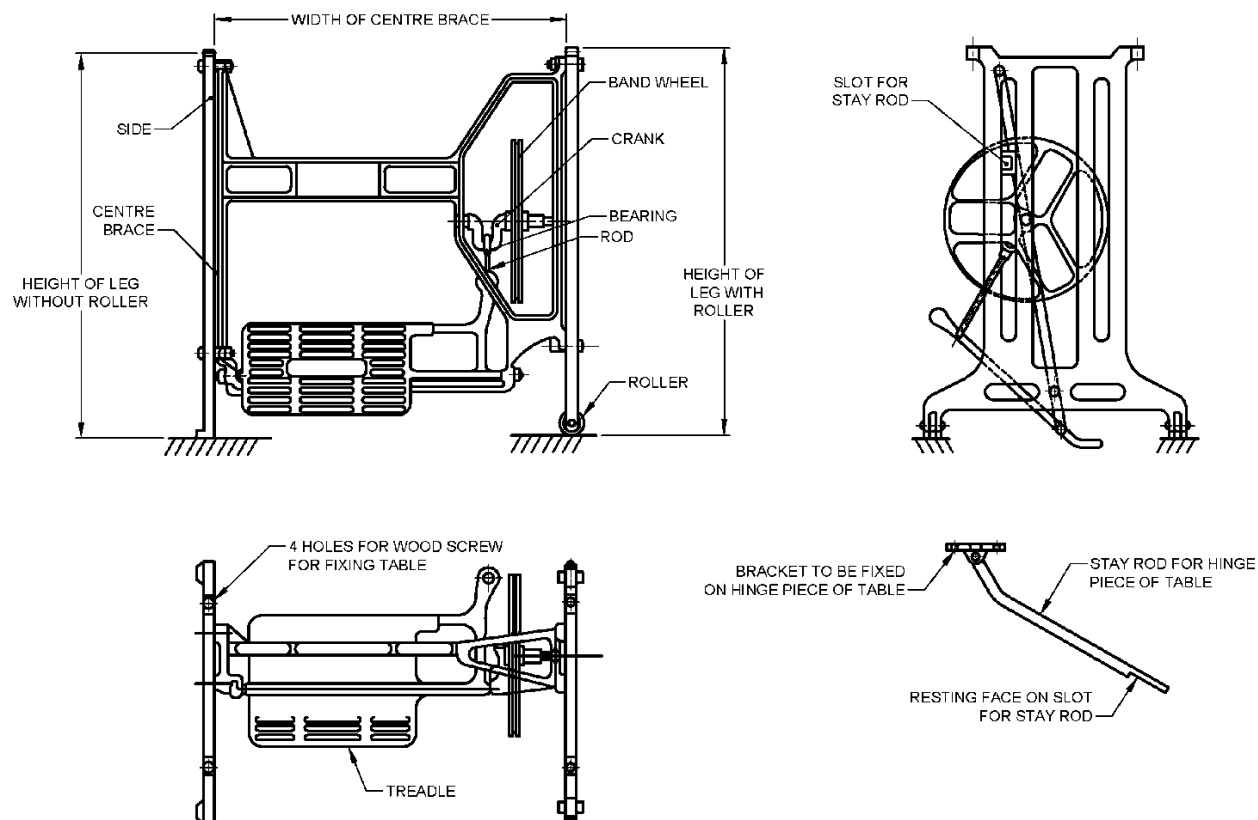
NOMENCLATURE OF INDUSTRIAL SEWING MACHINE – STAND
